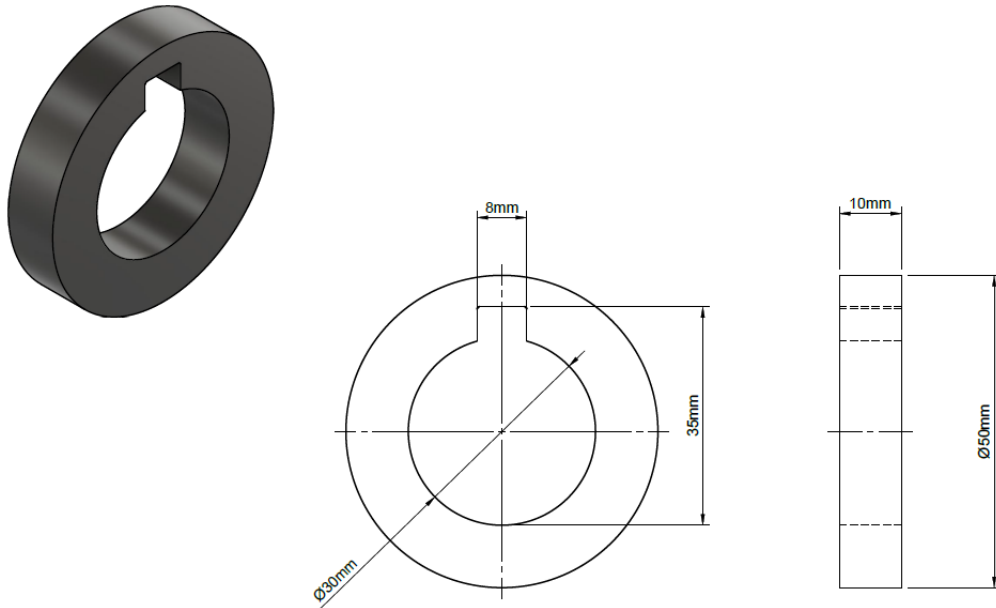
A schematic diagram showing dimensions of wheel/rail disc shaped specimens.
